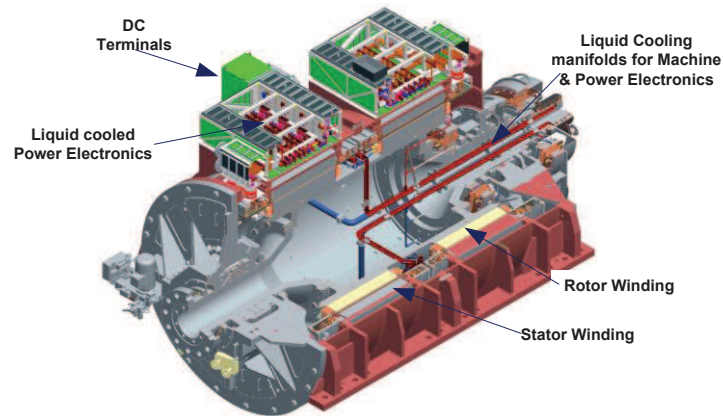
Concept 3D Model of Machine with Integrated Power Electronics using Liquid Cooling for Both Machine and Power Electronics .
